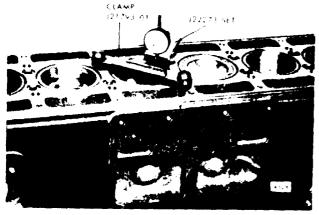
B-137. Checking Distance of Liner Flange Below Top Face of Block
